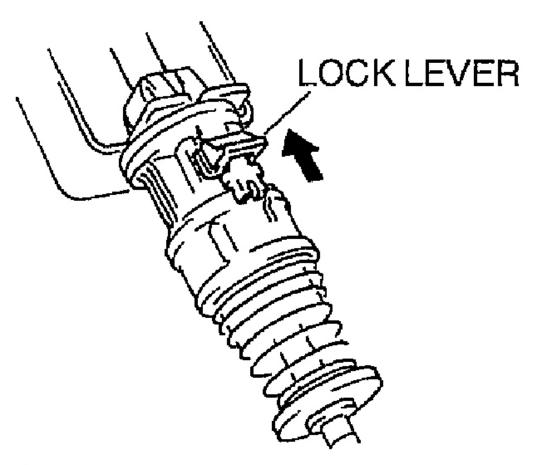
Installing Actuator Cable To Accelerator Pedal Courtesy of MAZDA MOTORS CORP.
